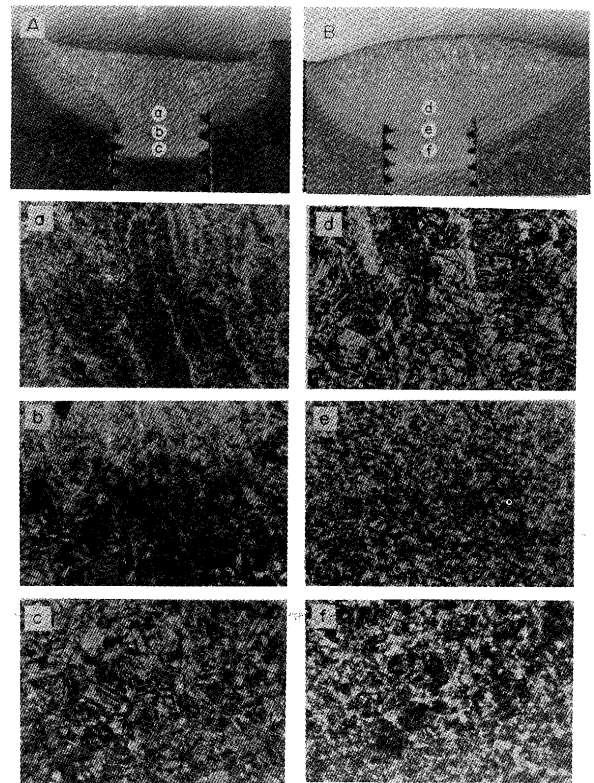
Macro- and microstructures of weld zone (In air welding)
